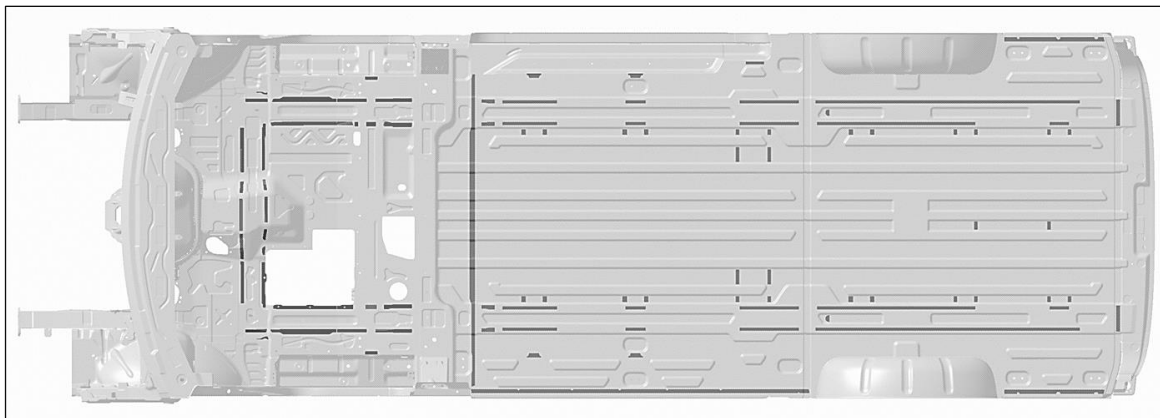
Panel van bonded joints (e.g. short wheelbase 3,640 mm)
